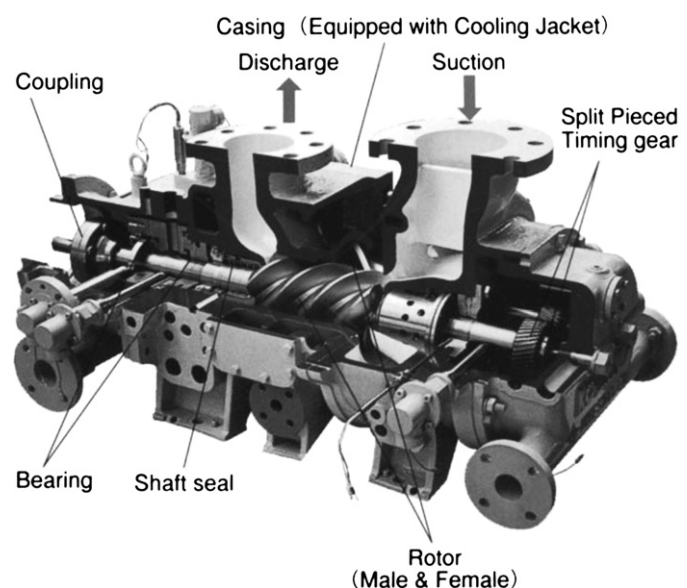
• Dry screw compressor (Courtesy of Kobelco – Kobe Steel Ltd)
